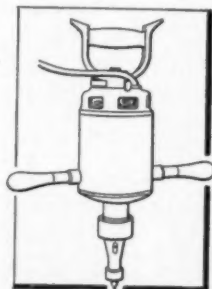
Electrical drill that can be used as a valve-grinding tool with either oscillating or rotating movement
